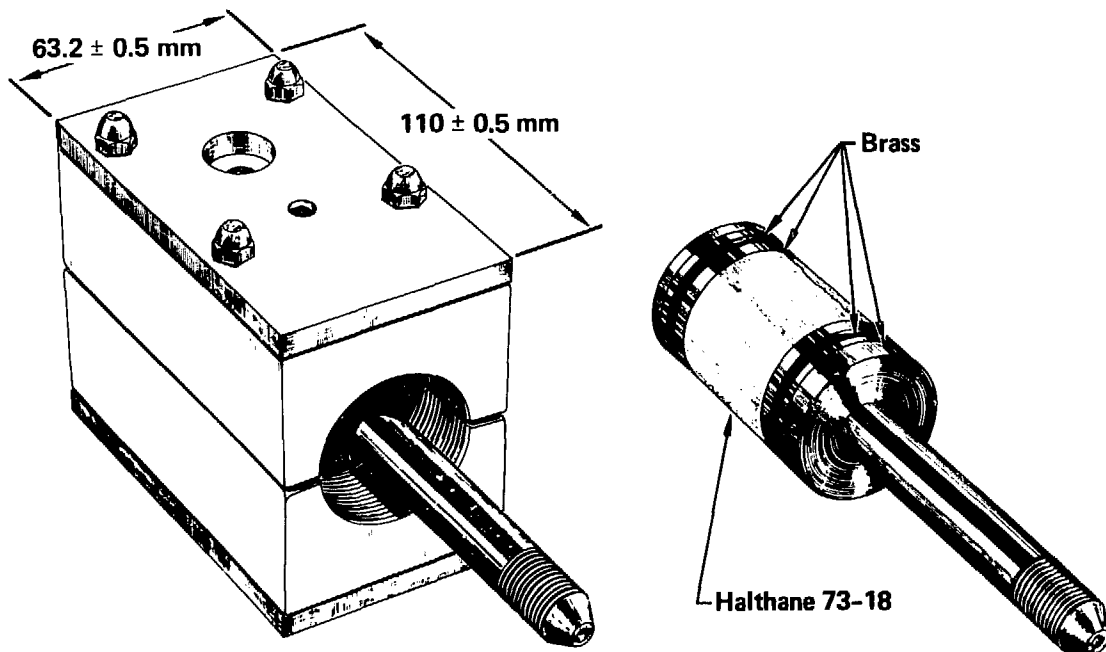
Assembled mold, sample and end fittings jacketed in Halthane 73-18.
